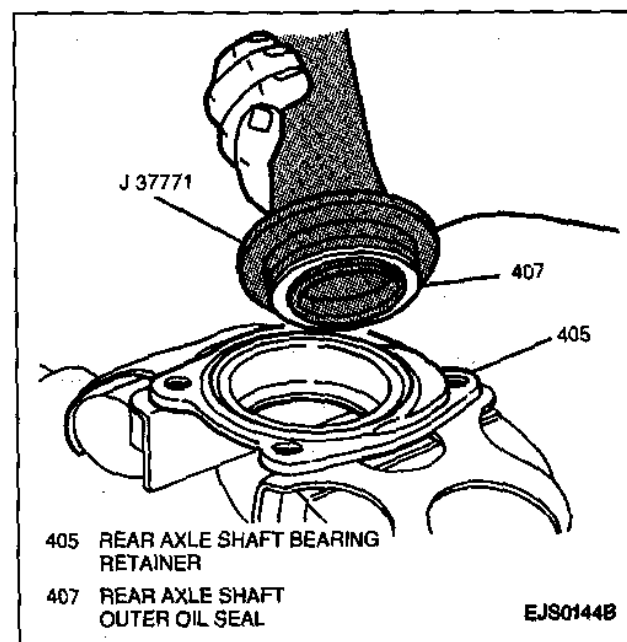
Installing Rear Axle Shaft Outer Oil Seal
